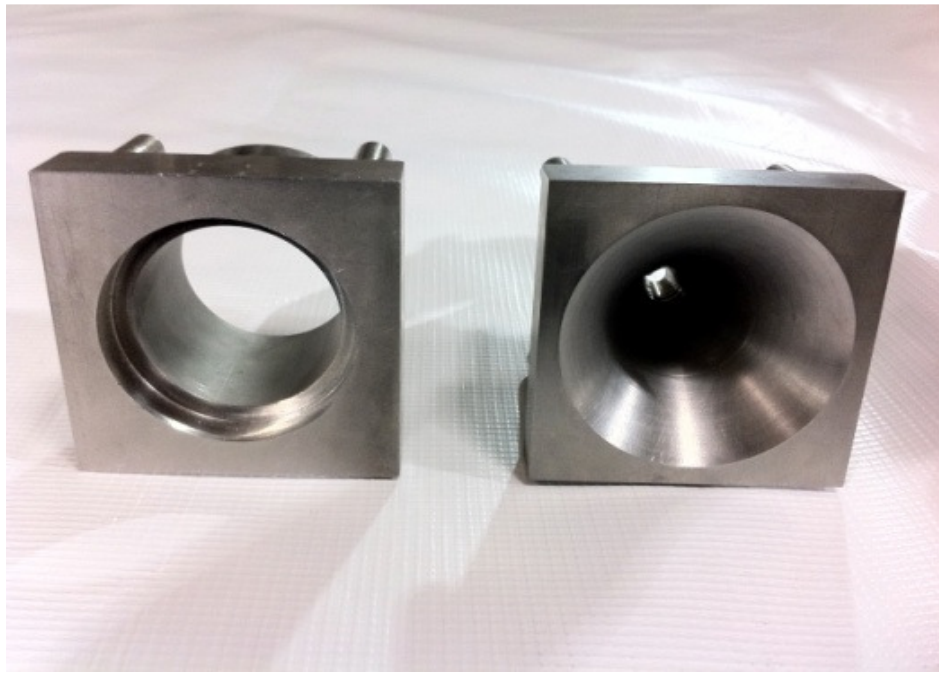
Completed MOAC Modules, Injector adaptor (left) and converging section (Right).
